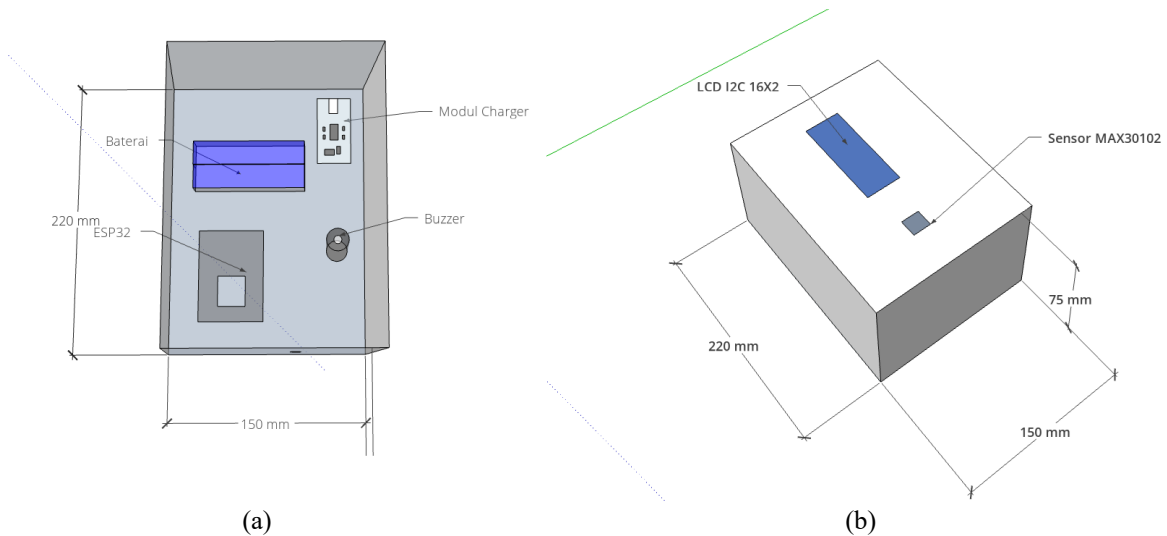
Physical Tool Design (a) Inside (b) Overall View
